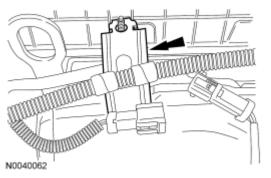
Locating Wiring Harness Bracket Courtesy of FORD MOTOR CO.
